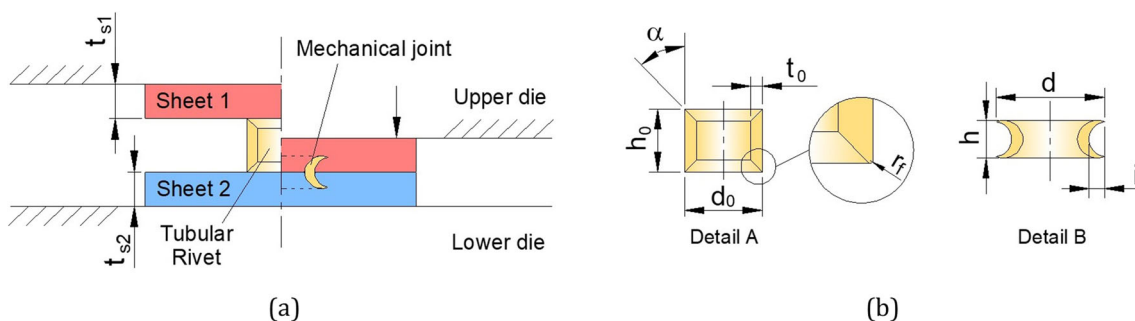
a Double-sided self-pierce riveting with (b) details of the tubular rivet before and after joining of the two sheets
